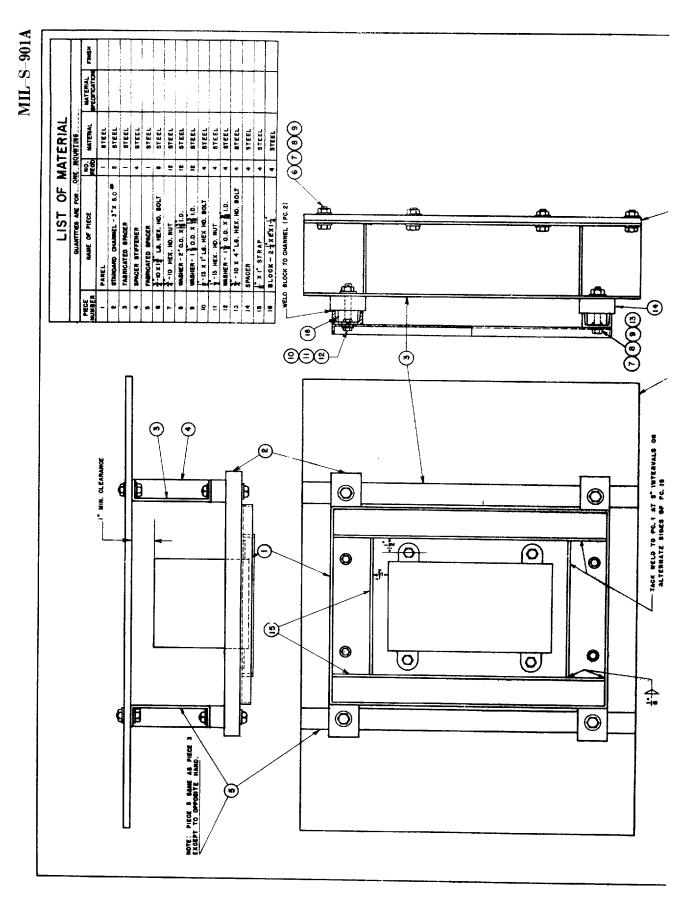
D.—Standard mounting for electrical indicating switchboard instruments and other panel-mounted equipment. Type "C" test—Light-weight equipment.
